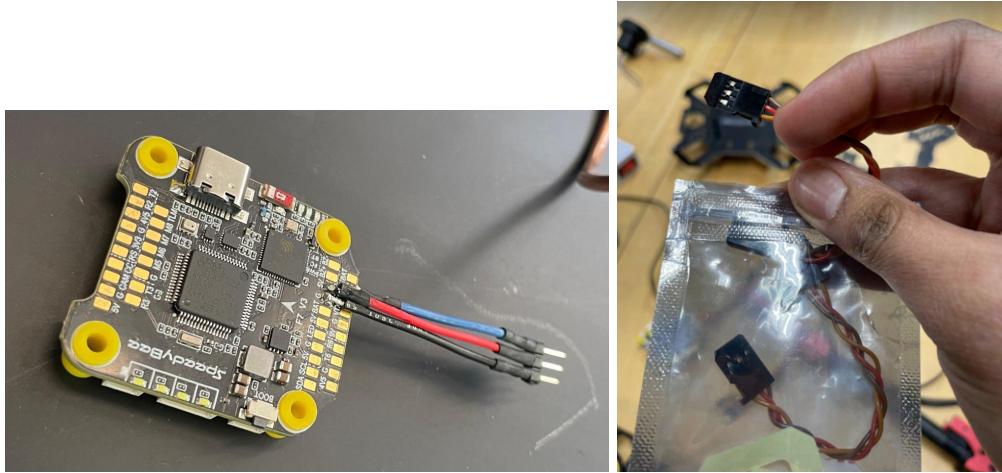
Wires soldered on flight controller (left image); servo female wires (right image)
